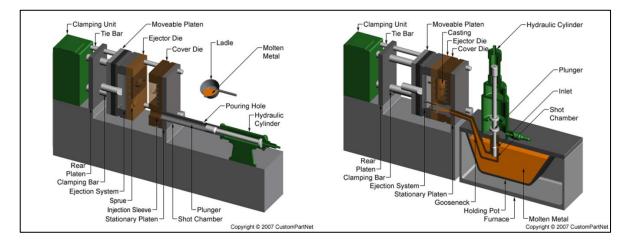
Left: Cold-chambered Die Casting Machine; Right: Hot-chambered Die Casting Machine
